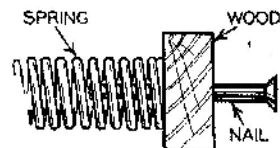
B.—A STOUT NAIL SHOULD BE DRIVEN THROUGH THE WOOD TO PREVENT THE SPRINGS JUMPING OUT OF THE VICE.
